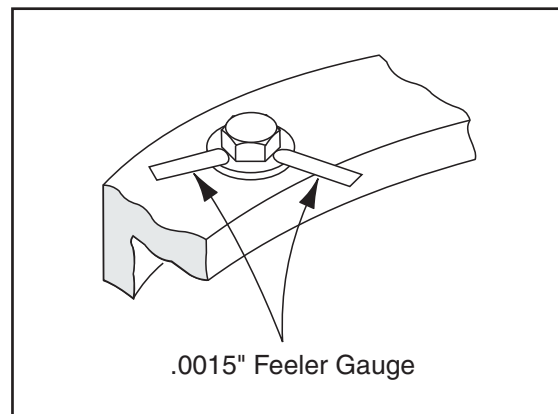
Swing Bearing Bolt Feeler Gauge Check
